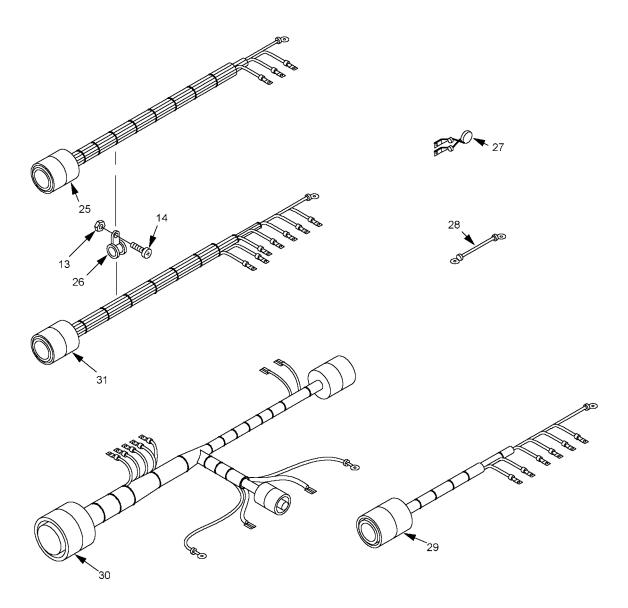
Condenser Assembly (Sheet 3 of 6)
